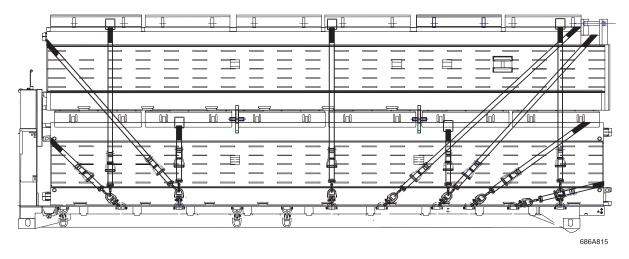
57 Flatrack Load V1 Lashing Arrangements
